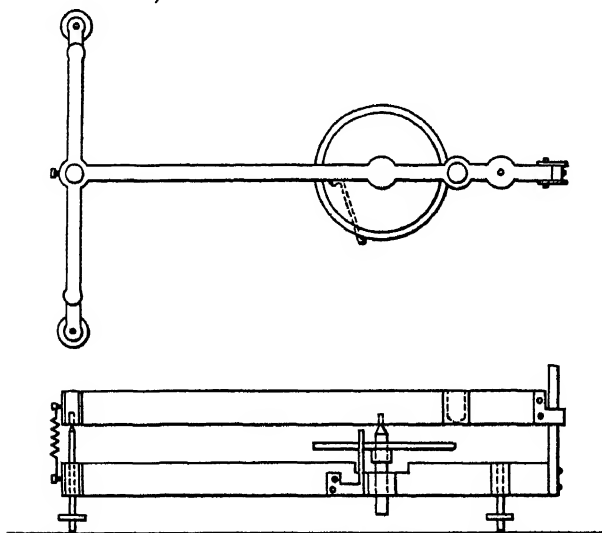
CHATTOCK TILTING MANOMETER ASSEMBLY
